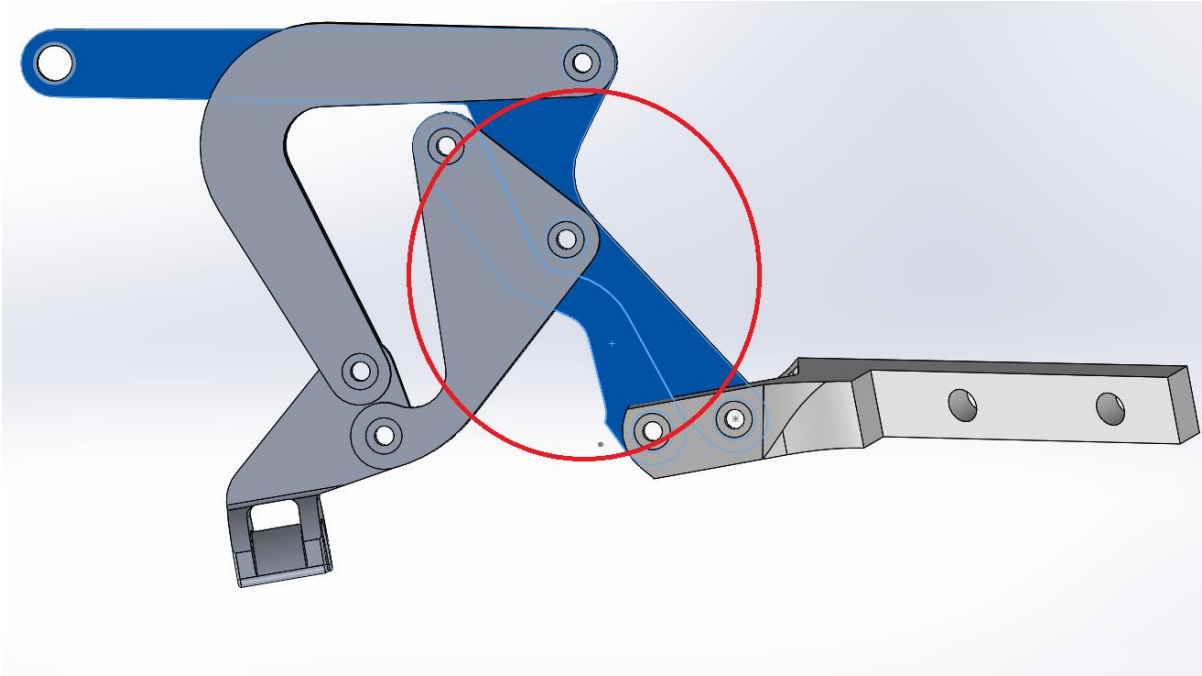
Mechanical contact in outer links preventing over-flexion outlined in red.
